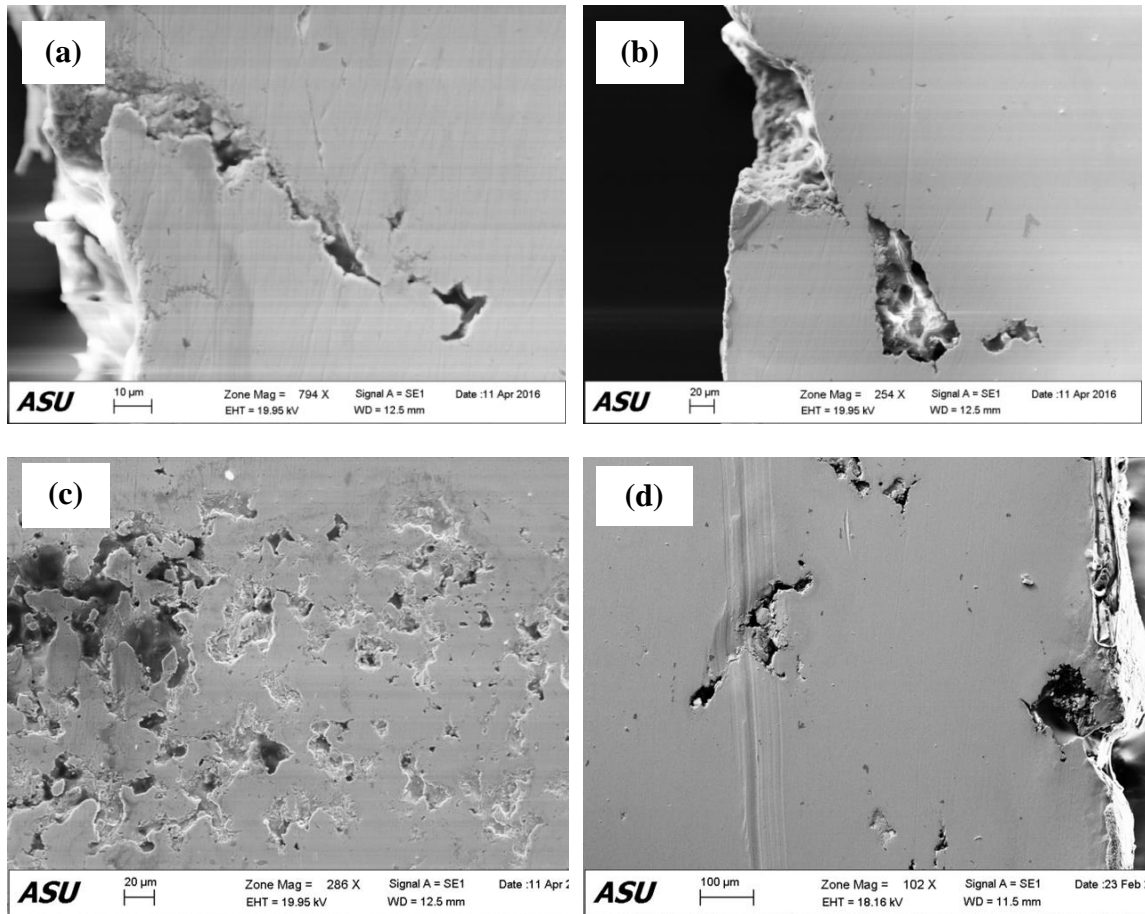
Test specimen with creep dominated failure (i.e. 900 s hold) shows (a), (b) linkage of surface cracks with sub-surface voids; (c) , (d) extensive void coalescence near fracture surface.
